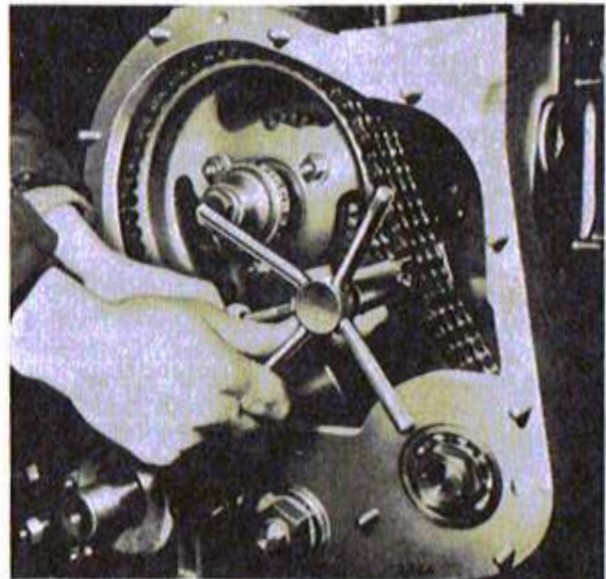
CHAIN RIVETER AND EXTRACTOR TOOL
